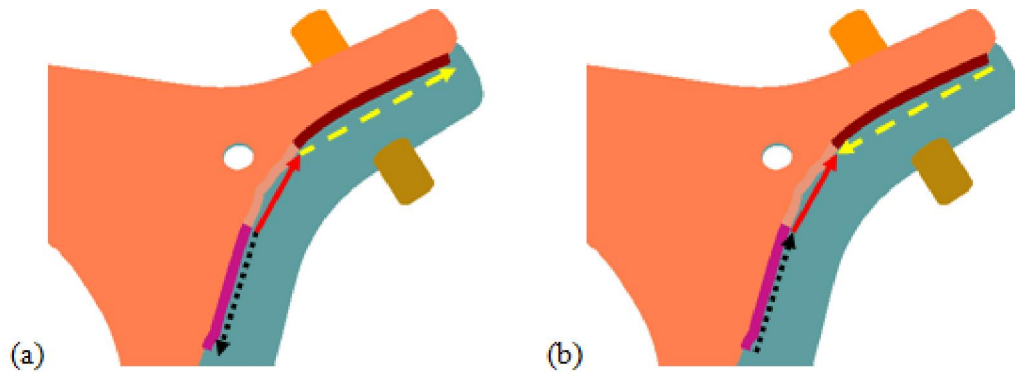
Illustration of the best and worst welding sequence found in this study- (a) best weld sequence and (b) worst weld sequence
